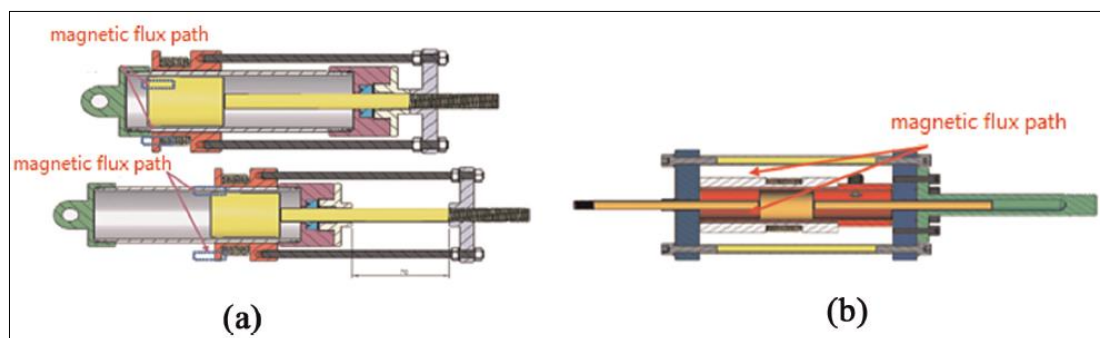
Schematic design of MR damper with external coil (a) damper with simultaneously moving external coil and piston and (b) damper with fixed external coil [24]
